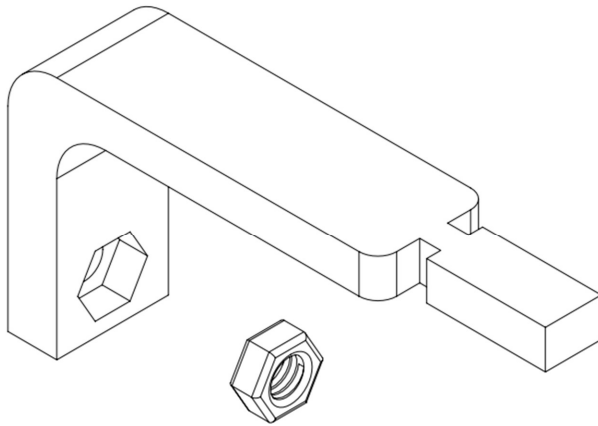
Isometric Exploded View of Hex Nut and Finisher
